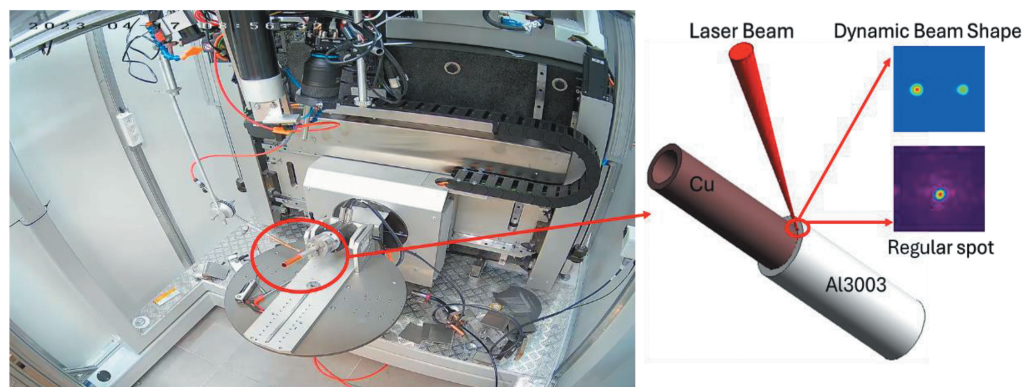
Welding cell, scheme of welding process, regular and dynamic beam shape (2 dots).
